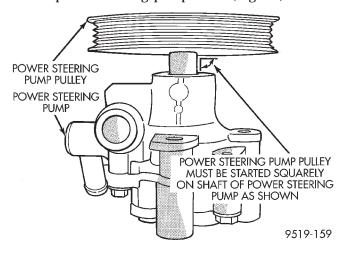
Pulley Positioned On Shaft Of Power Steering Pump
